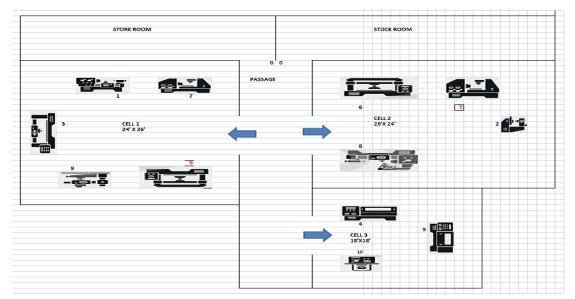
Cell layout design for Bench mark problem 2-10machines x 8 components Bench mark problem
